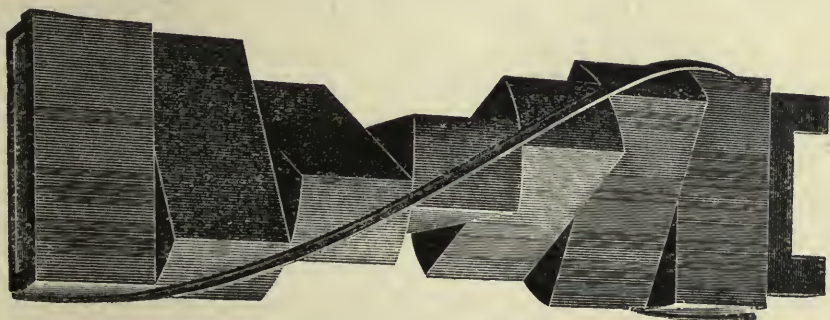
Refractory Blocks used in Bonecourt Boilers.
